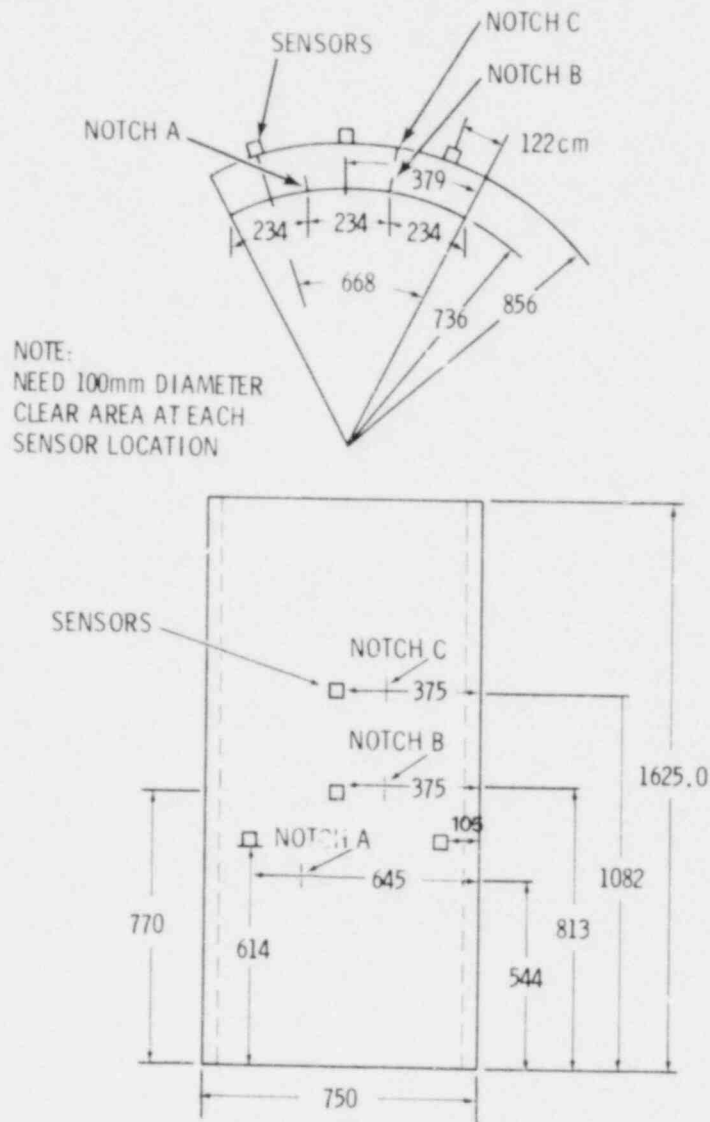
Sensor Layout for A533B Insert in ZB-1 Test Vessel (dimensions in millimeters)
